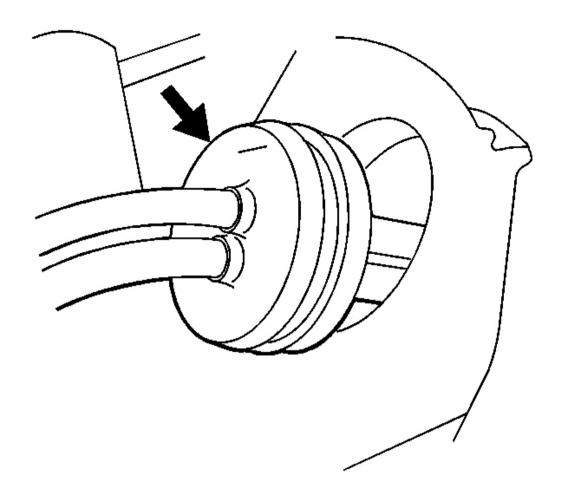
Shift Cable Pass-Through Grommet Courtesy of GENERAL MOTORS CORP.
